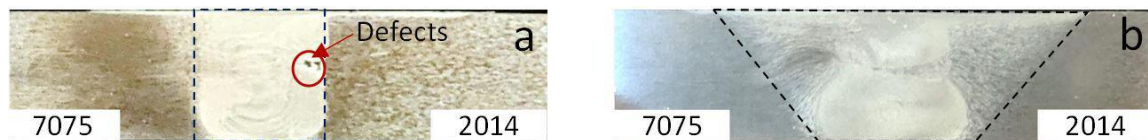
Macrostructure of transverse cross-section of welded joints at (a) lowest heat input parameter [RS= 600 rpm; WS = 180 mm/min] and, (b) highest heat input parameter [RS = 1400 rpm; WS = 60 mm/min].
